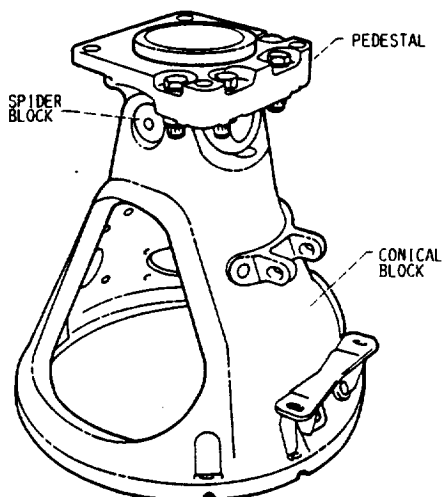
ENGINE MOUNT GIMBAL ASSEMBLY.
